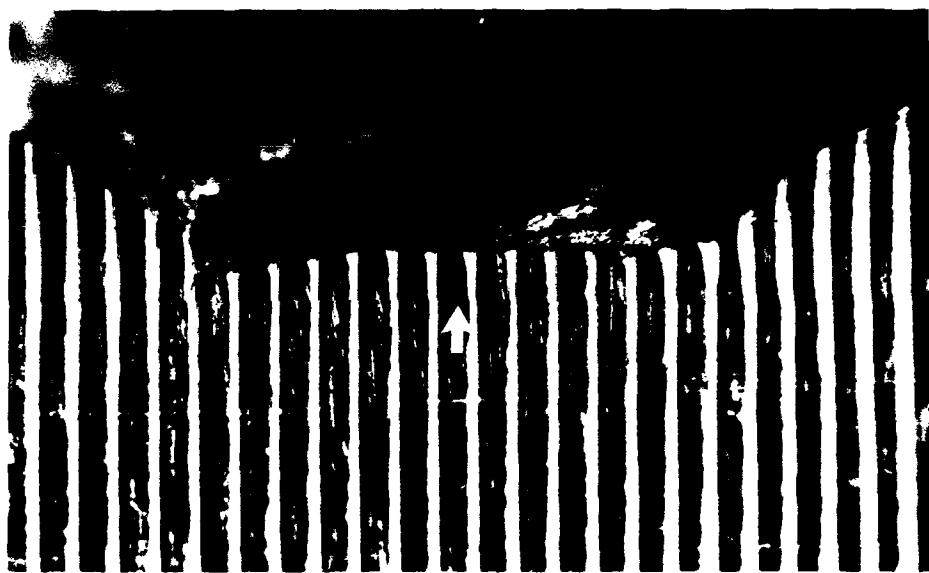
HOLE SURFACE FINISH IN REGION OF THE LARGEST CRACK ON FRETTED SIDE OF SPECIMEN BJ20DB - MAGNIFICATION 23X.
